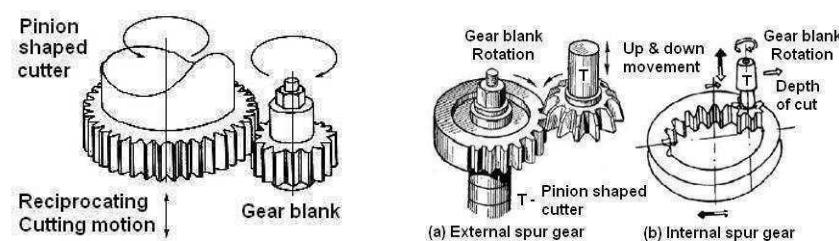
Setup of gear teeth generation by gear shaping operation with a pinion-shaped cutter
